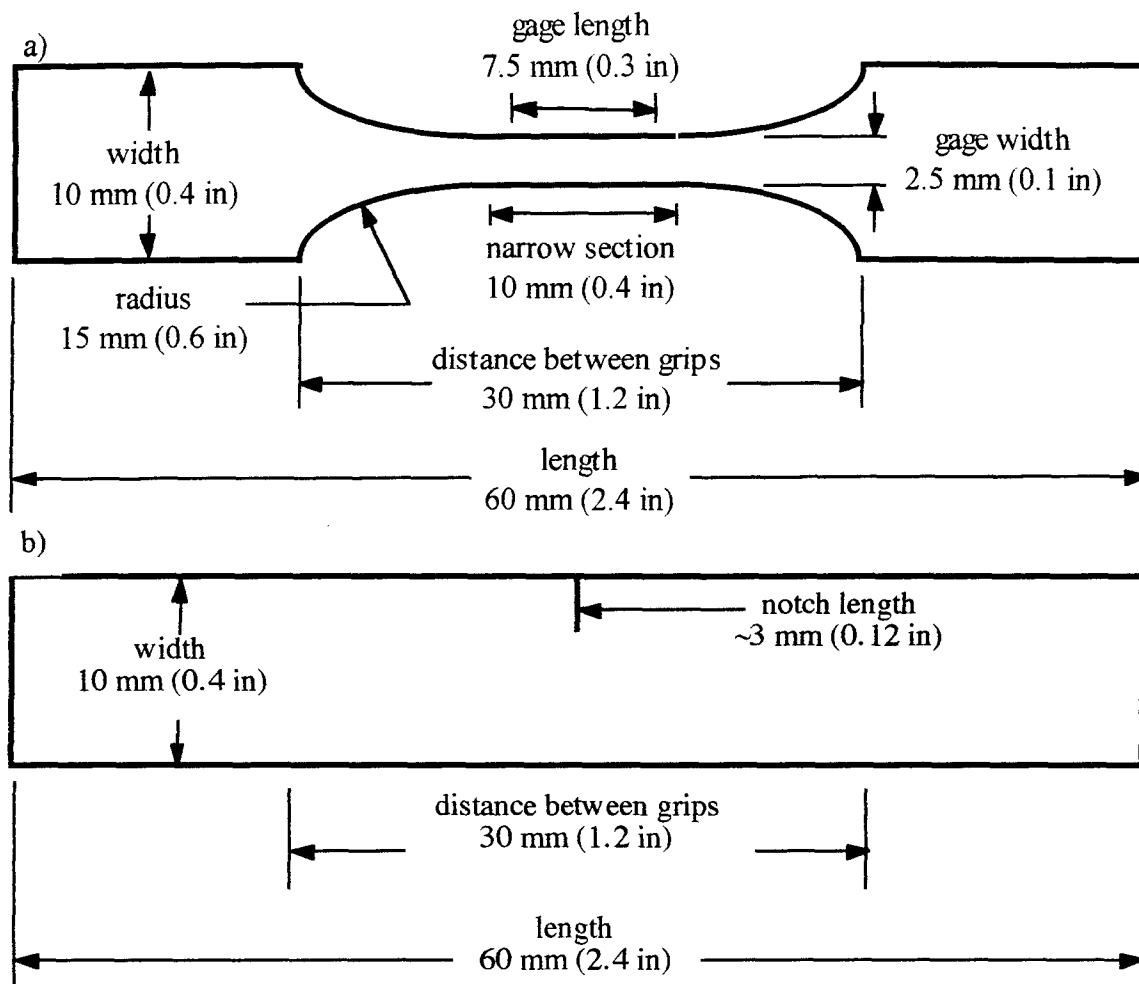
Specimen geometry for (a) the ASTM D 638M Type M-III "dogbone" specimen used for tensile testing, and (b) the "straight-sided" specimen used for fracture toughness testing
